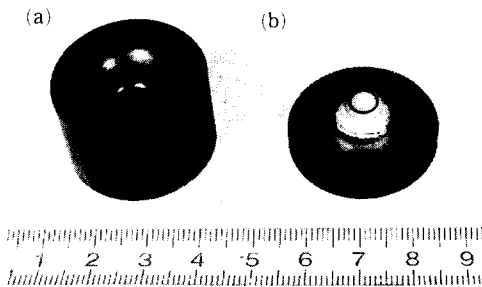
Photograph of (a) graphite lower punch and (b) alumina valve head shape part after 100 min under hot pressing at 1500°C
